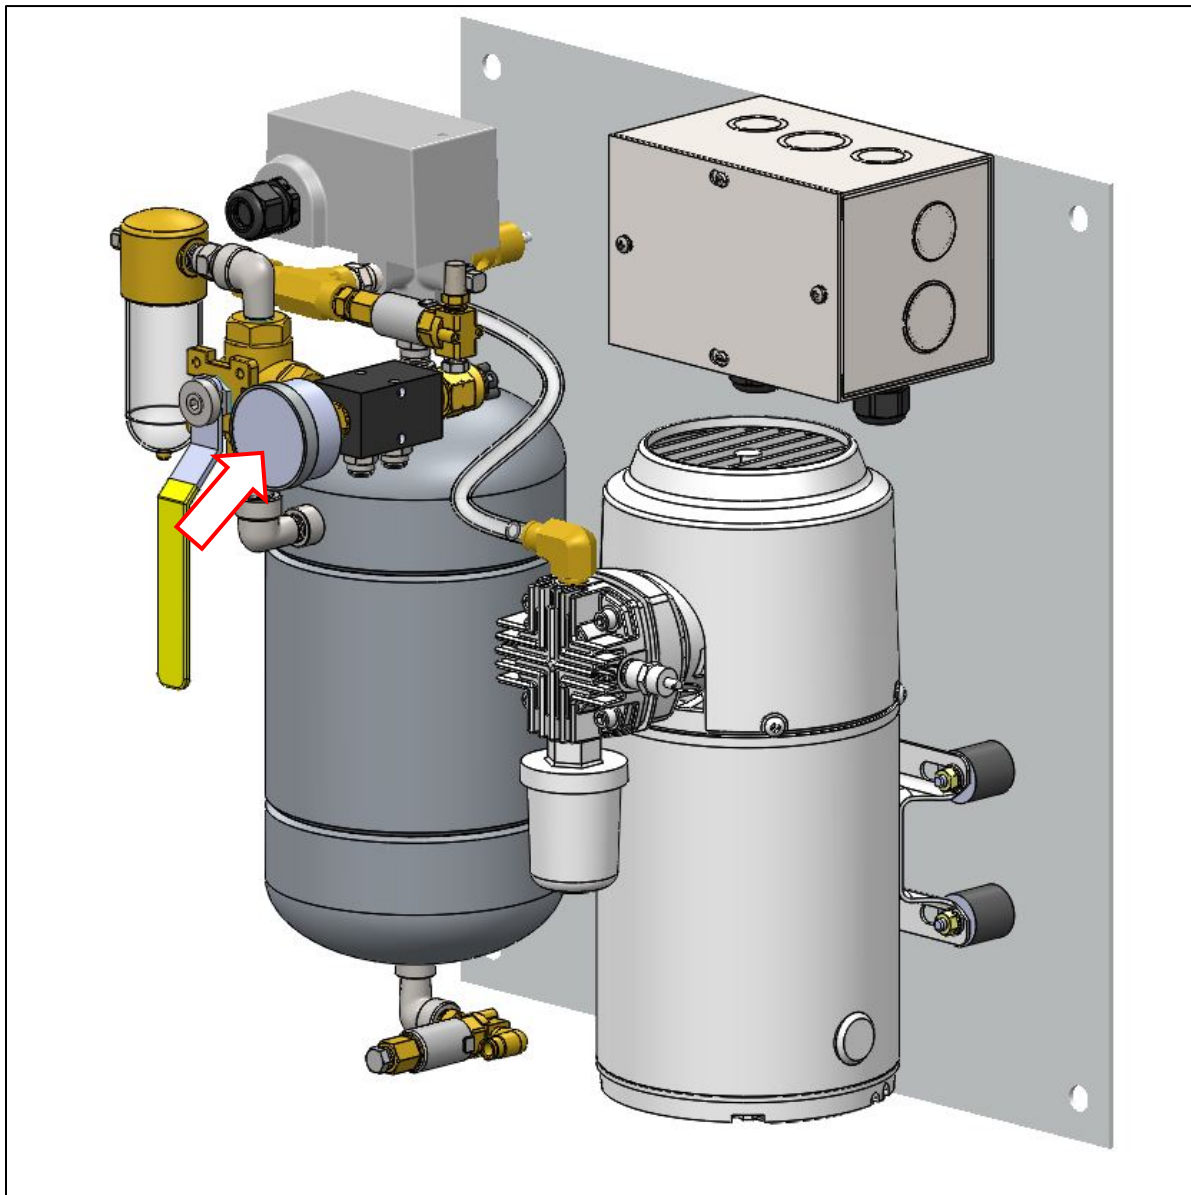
AIR COMPRESSOR ASSEMBLY
